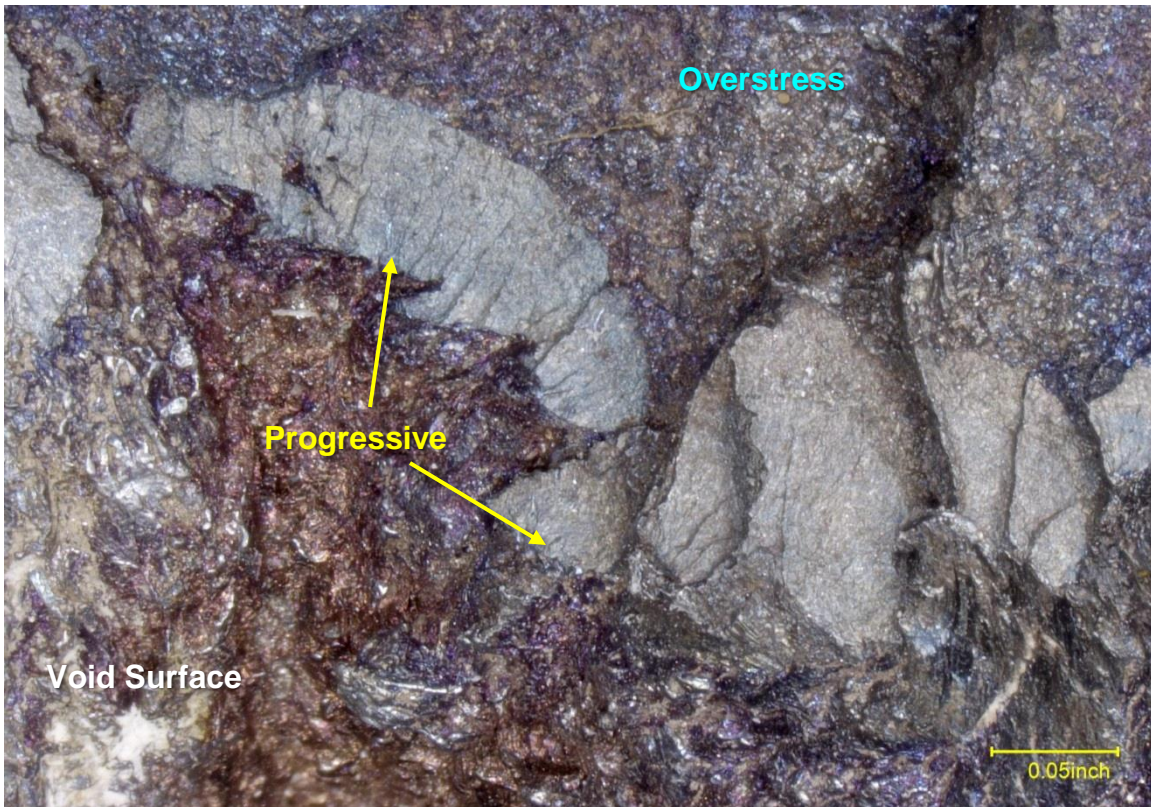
Small fatigue cracks that had initiated and grew from the internal void in the axle.
